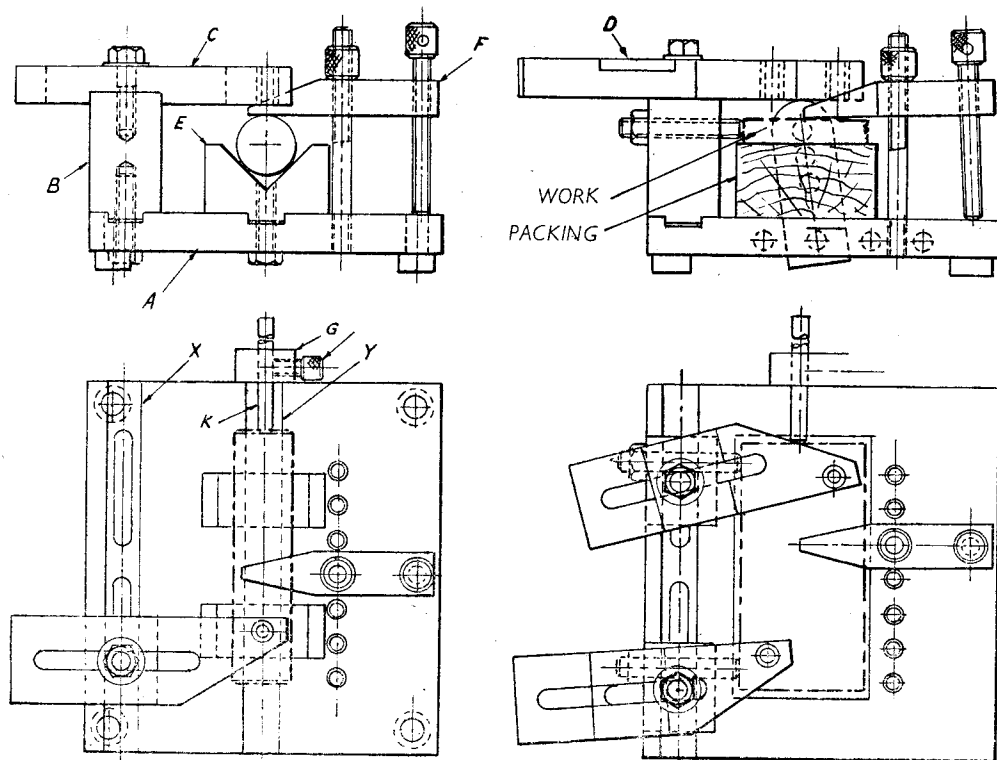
Left—Jig set up for drilling pins, shafts etc. Right—Jig set up for drilling plates, etc.
